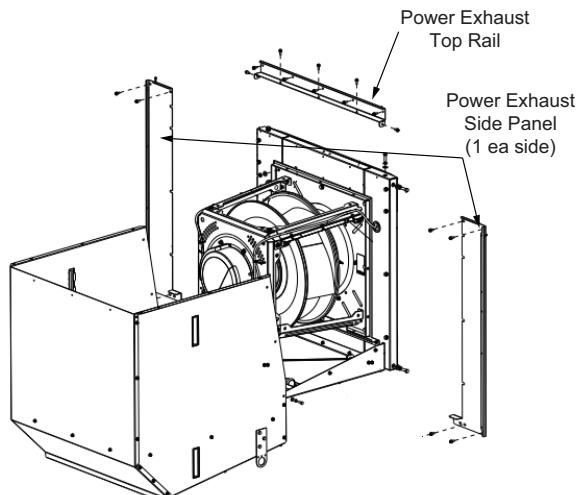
Power Exhaust Top Rail and Side Panel Locations
